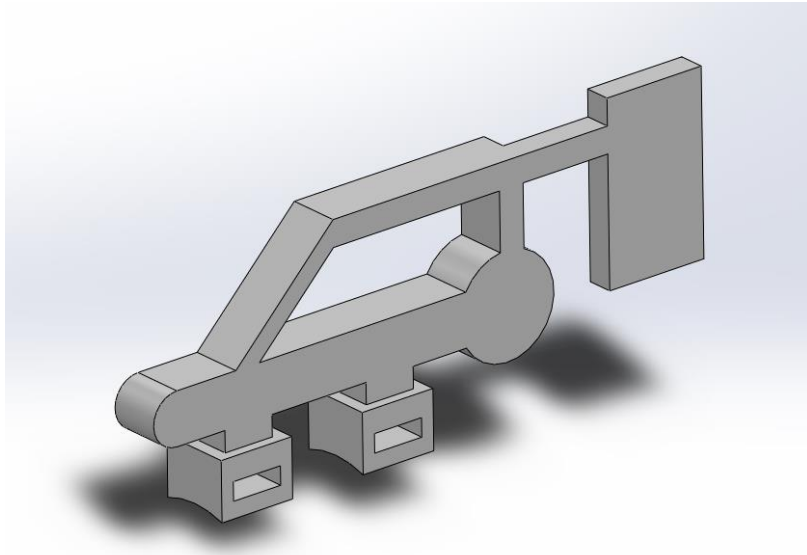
2nd Iterative Thumb Part Drawing in Isometric View.
